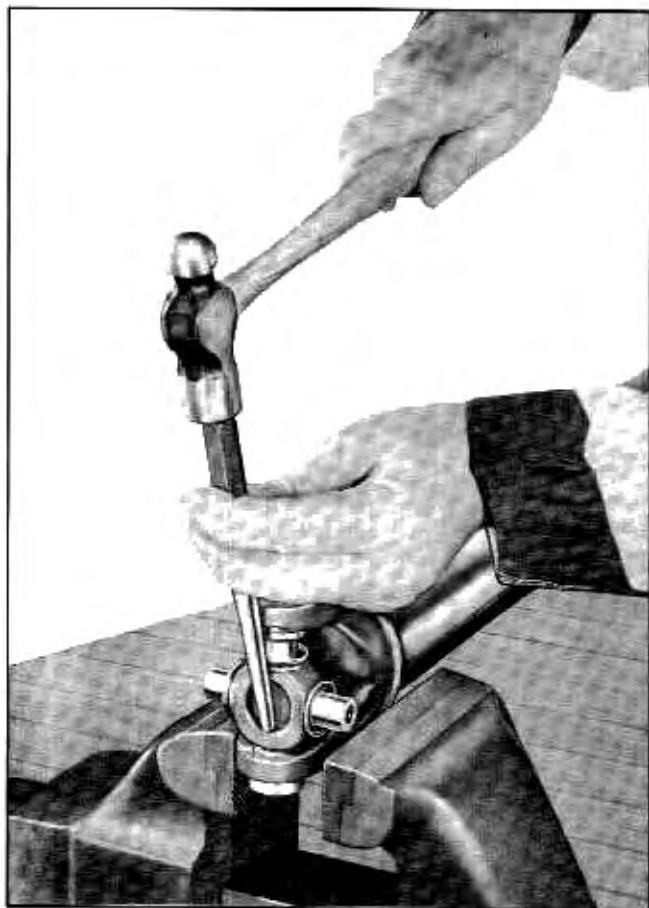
Removing Bearing From Fixed Yoke Member
